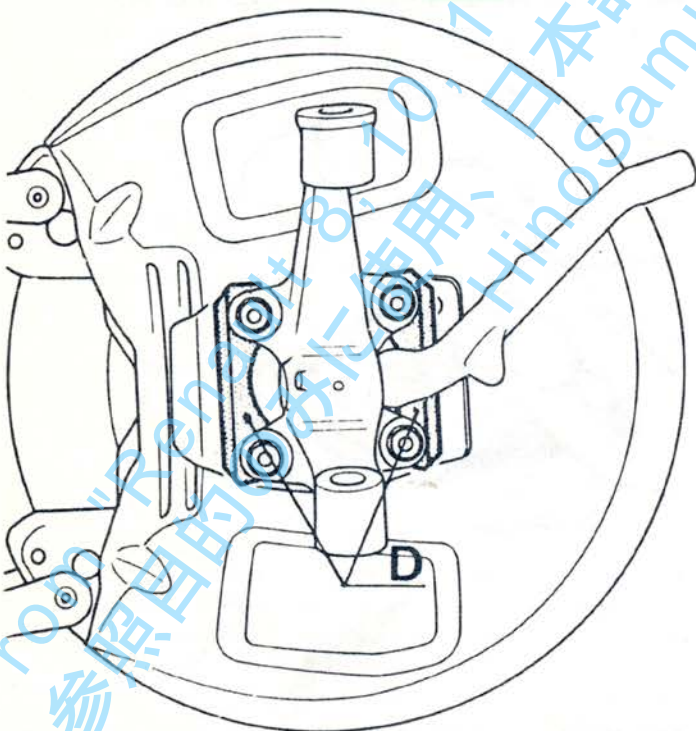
14 Shims for adjusting the caliper bracket on front wheels
